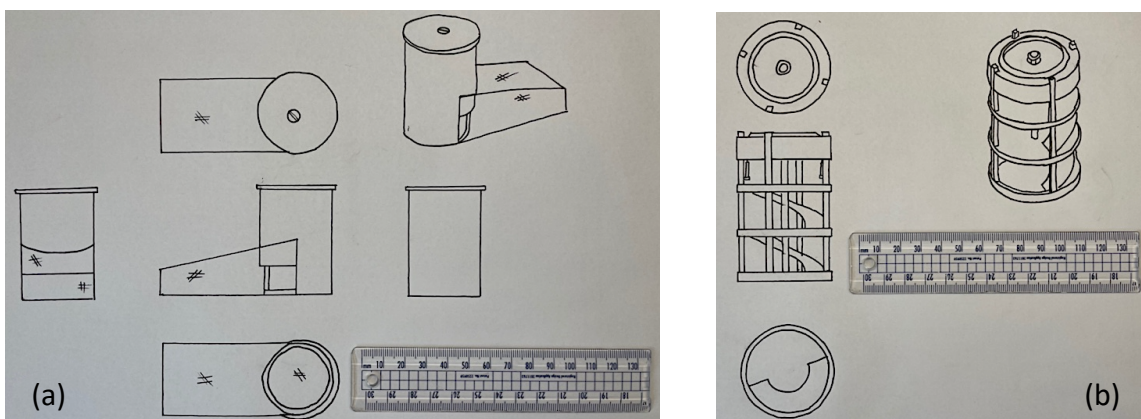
Scale Drawings of outside structure (a) and inside structure (b)
